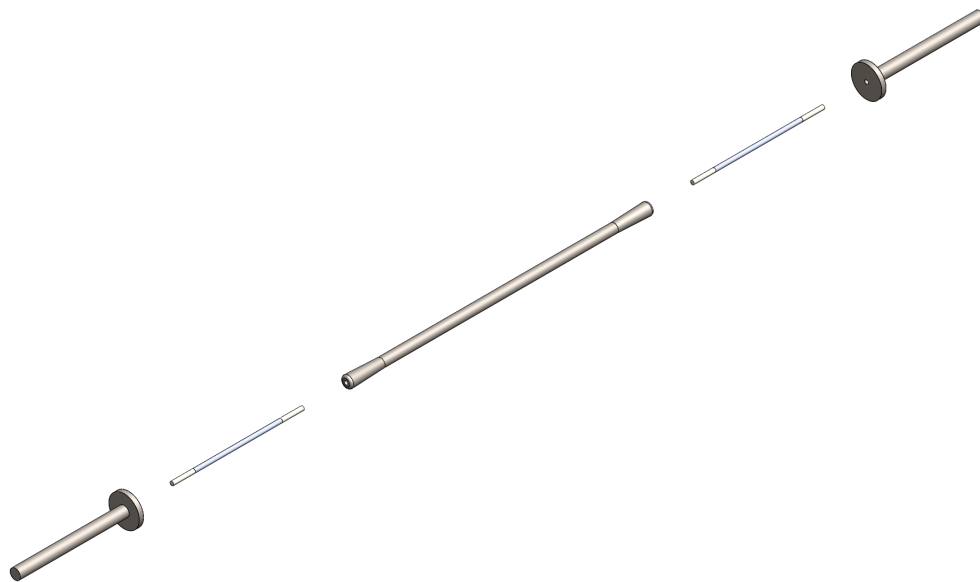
Full Plug assembly after being adjusted for manufacturing purposes
